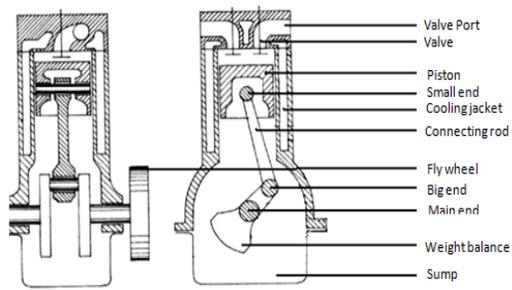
Insight of a typical single cylinder engine (Courtesy: [spx ltd](#))
